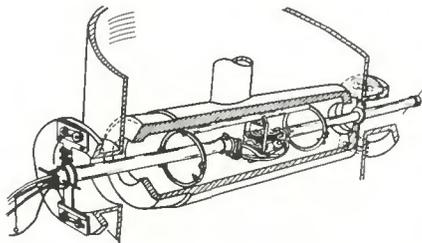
Assembly inside header for friction welding of plug (Ref. 30)
